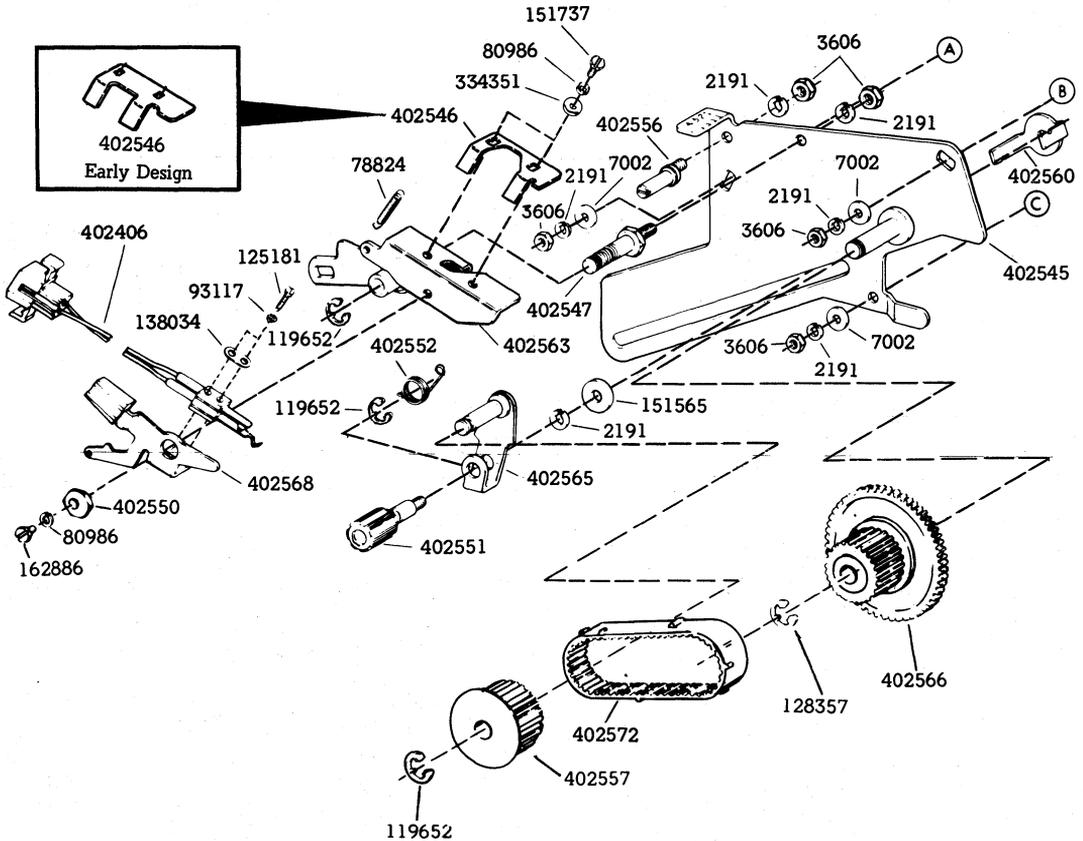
402570 Form-Out – Assembly (Tractor Feed – 80 and 132-Column)
